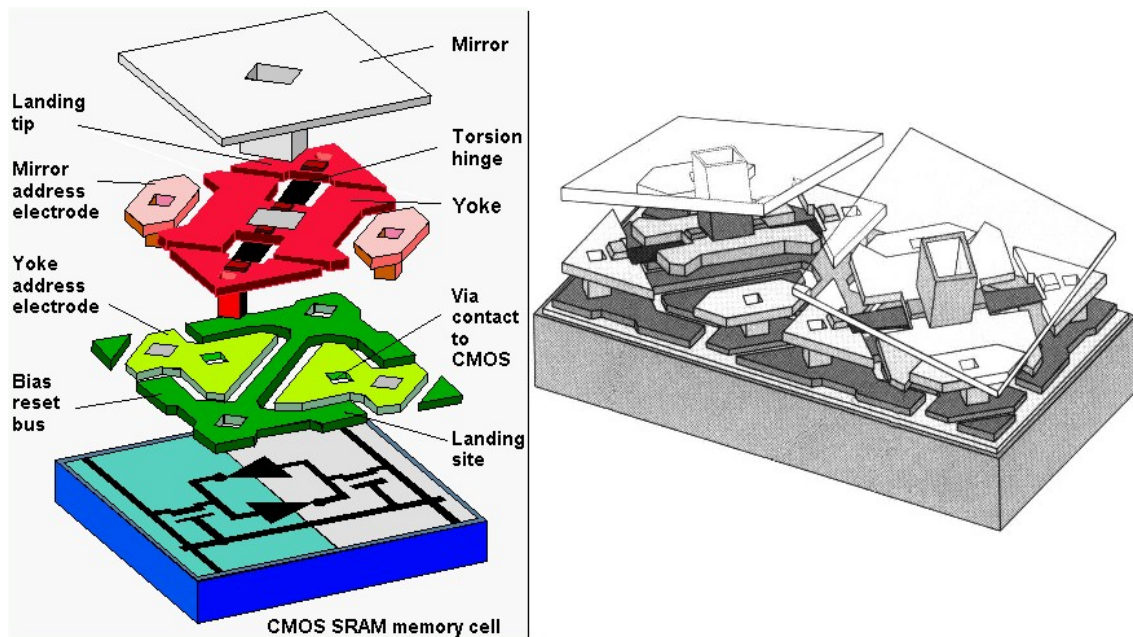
exploded view of a single DMD cell (left) and 2-pixel DMD assembly (right).
